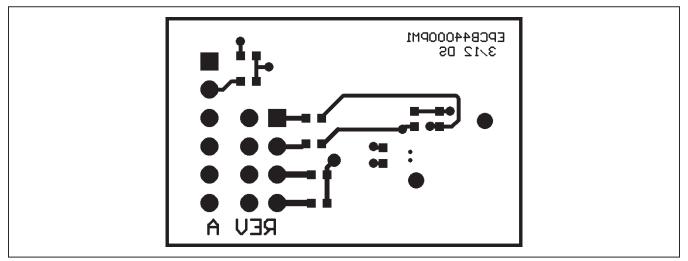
MAX44000PMB11 Peripheral Module PCB Layout—Solder Side
